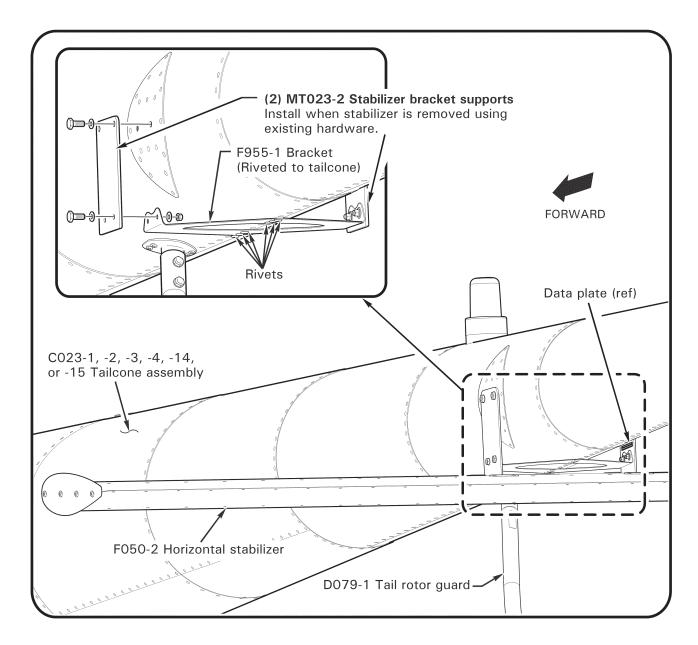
F050-2 HORIZONTAL STABILIZER ASSEMBLY
